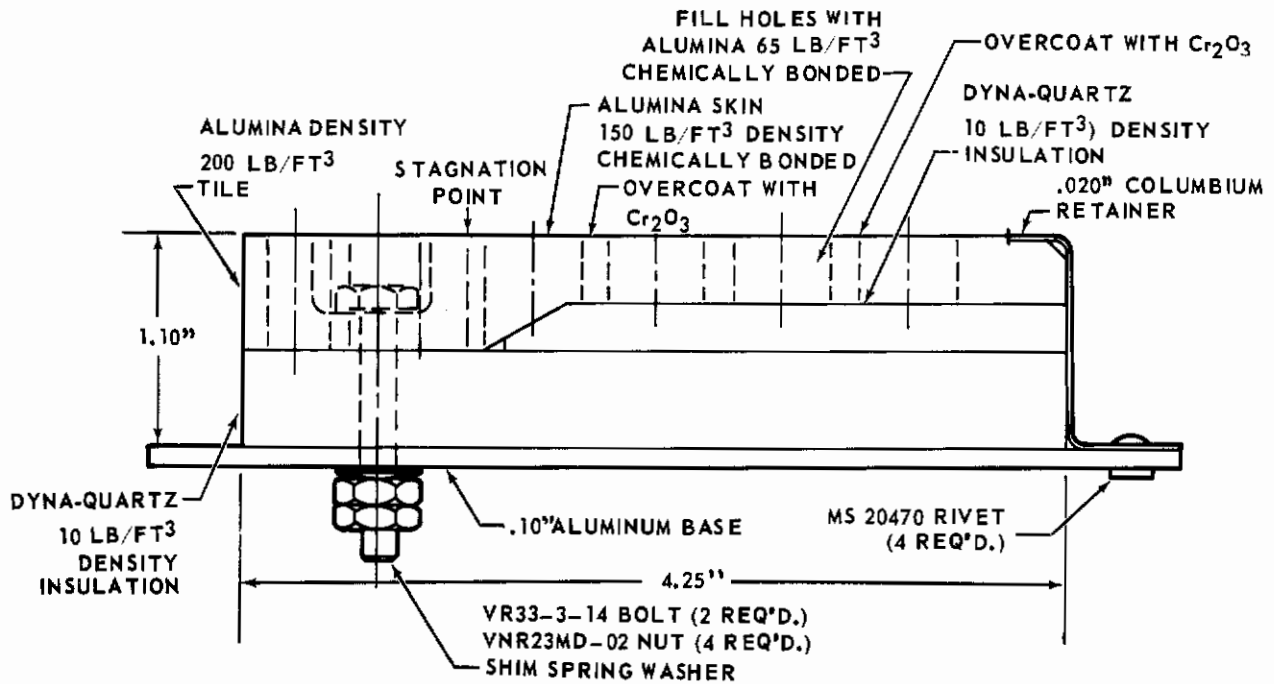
SUBSCALE THERMAL TEST FACILITY
